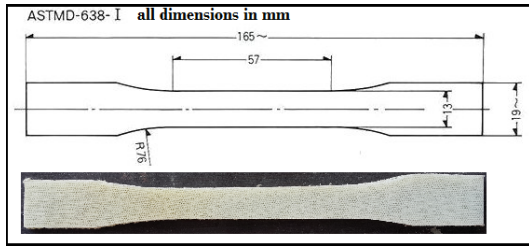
Tensile test specimens and the dimensions for available and suggested material.
